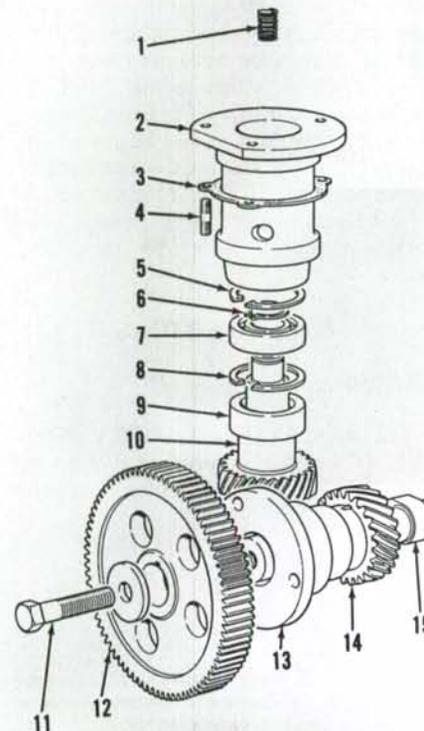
Exploded view showing three-cylinder diesel fuel injection pump drive assembly and related parts.
